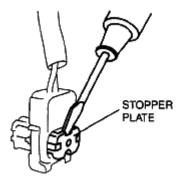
Prying Out Connector Stopper Plate Using Screwdriver Courtesy of MAZDA MOTORS CORP.
